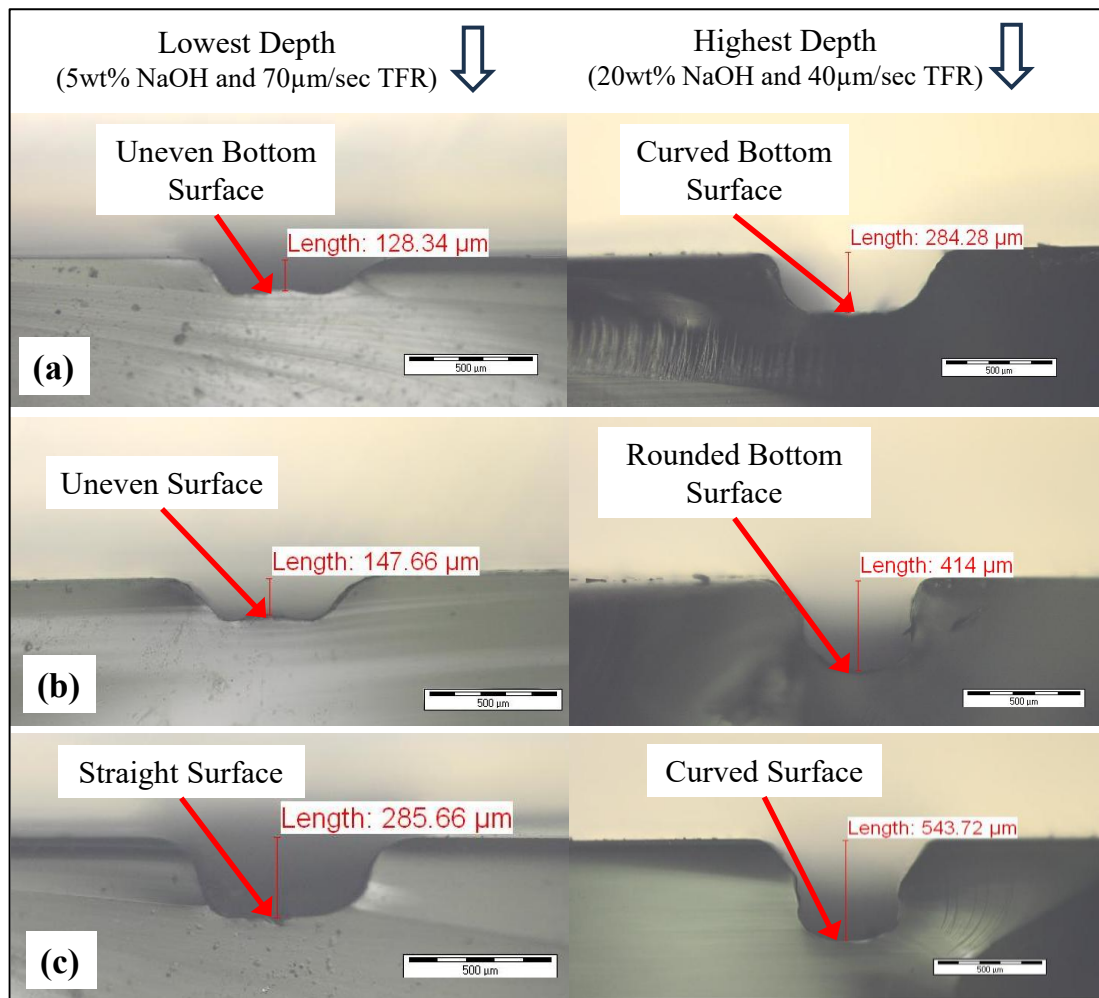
23 Optical images of cross-sections of channel for (a) existing tool feeding, (b) bottom tool feeding, (c) upward tool feeding
